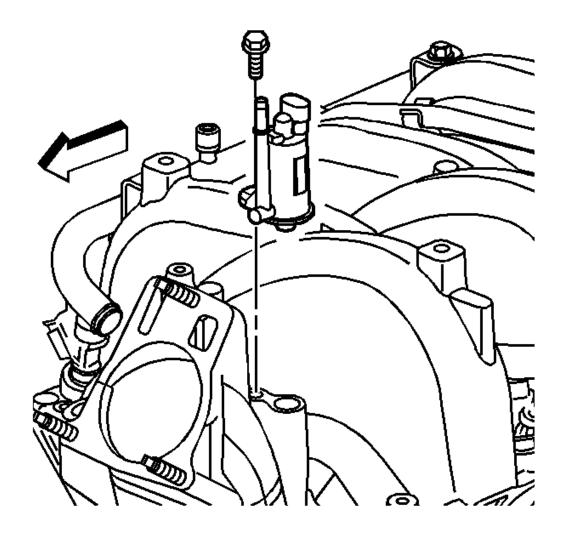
View Of EVAP Purge Valve Courtesy of GENERAL MOTORS CORP.
